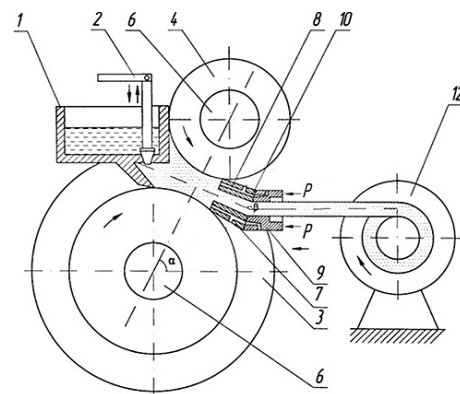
The device for continuous casting, rolling and pressing: 1 – furnace mixer; 2 – regulator; 3 – a roll with a groove; 4 – a roll with a ledge; 5 – frame; 6 – cavities for cooling; 7 – prechamber; 8 – the cooling channels; 9 – matrix; 10 – wedge-shaped cavities for cooling; 11 – hydraulic clip; 12 – winder [20].
